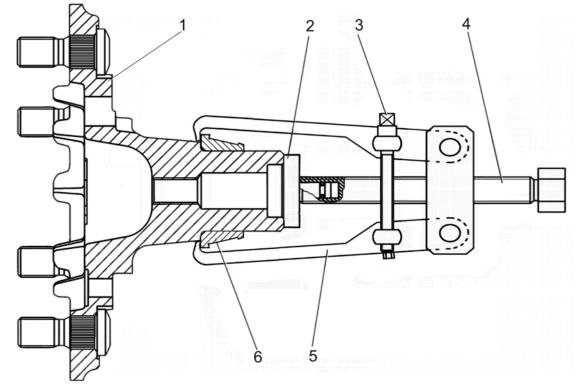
Removing the bearing inner race from the hub: 1 - hub; 2 - thrust bearing; 3 - bolt; 4 - screw; 5 - claw; 6 - bearing inner race
